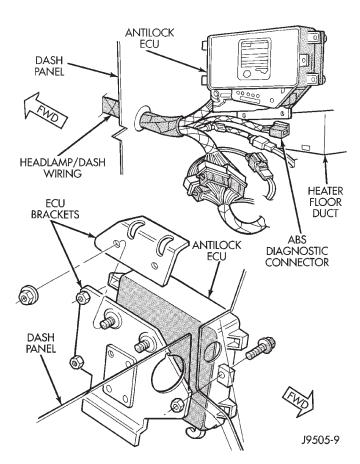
Antilock ECU Mounting (Right Hand Drive XJ)
